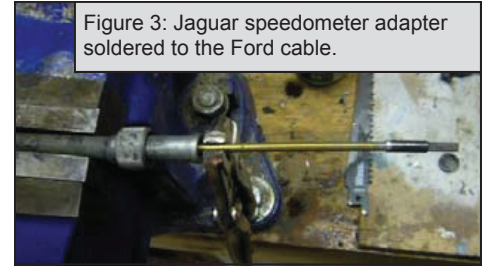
Jaguar speedometer adapter soldered to the Ford cable.
